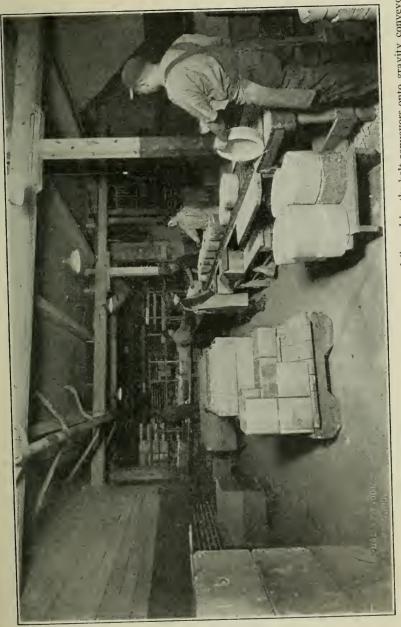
View of the Inspection Department. Saggers of fired ware are delivered by the belt conveyors onto gravity conveyor Inspectors on either side of the conveyor remove the pieces, inspect them and place them in skid frames or pack them directly in cartons. The man at the end of the conveyor removes the saggers and pallets and delivers them back to the loading dock and the kilns to be used over again immediately. extending through the inspection room.
